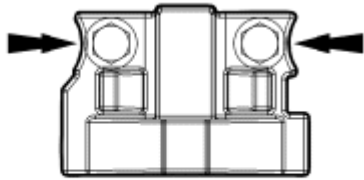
Removing LH Camshaft Phaser And Sprocket Assembly
